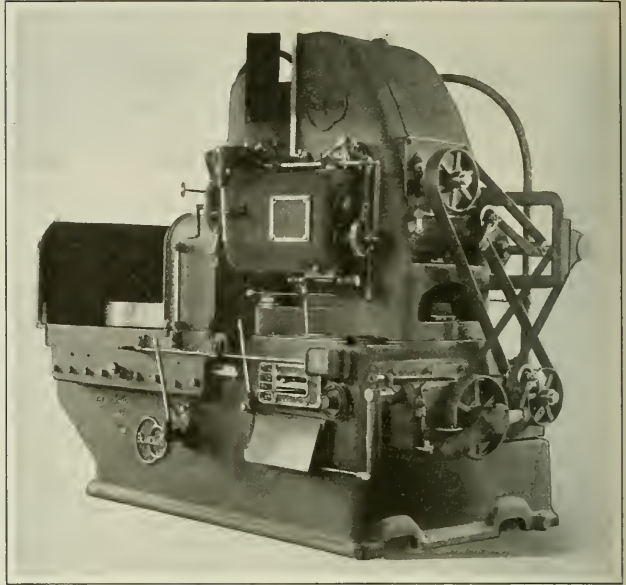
Right-hand End of Blanchard Grinding Machine, showing Drive to Various Units
